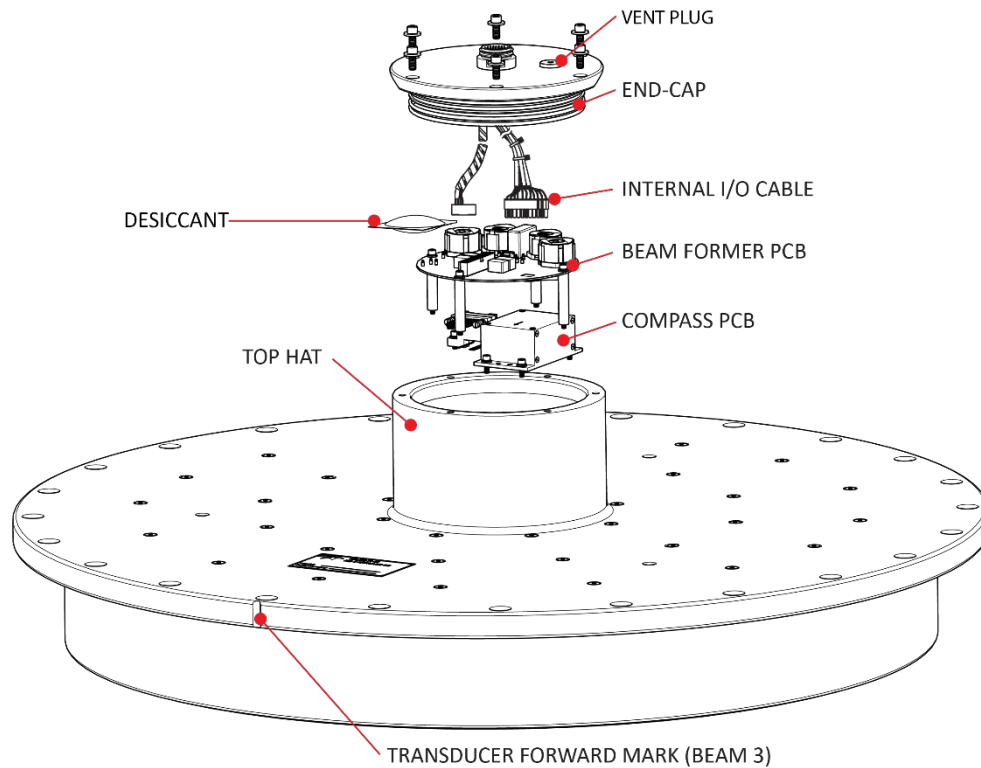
Transducer PCB Layout (38 kHz Round Transducer Shown)
